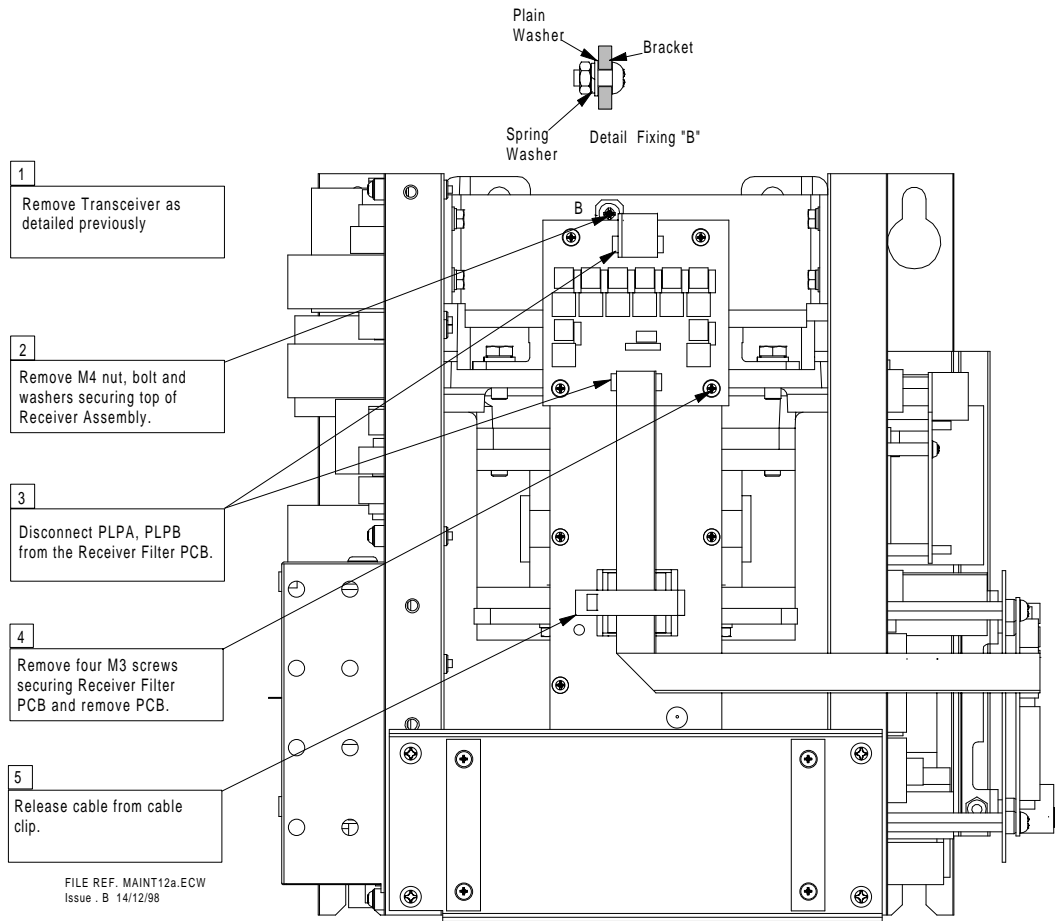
(Sheet 1 of 2) Replacement of Receiver Assembly 65830616
